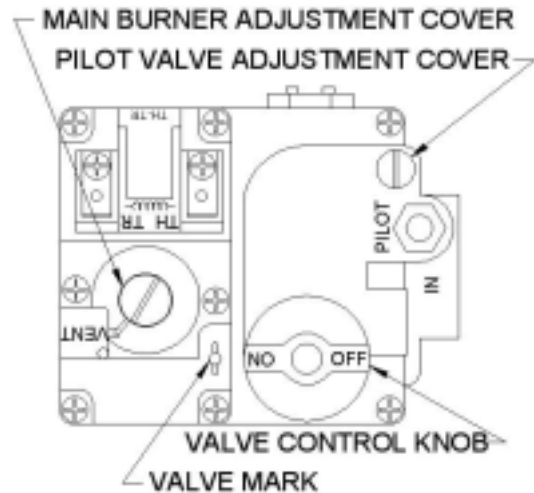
GAS CONTROL VALVE & KNOB POSITIONS
